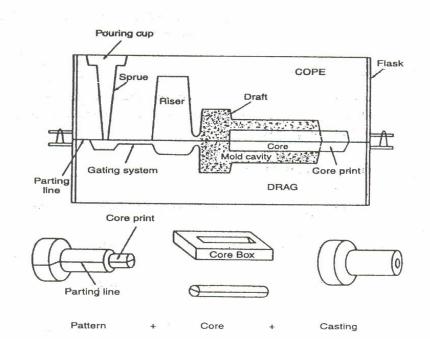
Cross Section of a typical two-part sand mold, indicating various mold components and terminology
